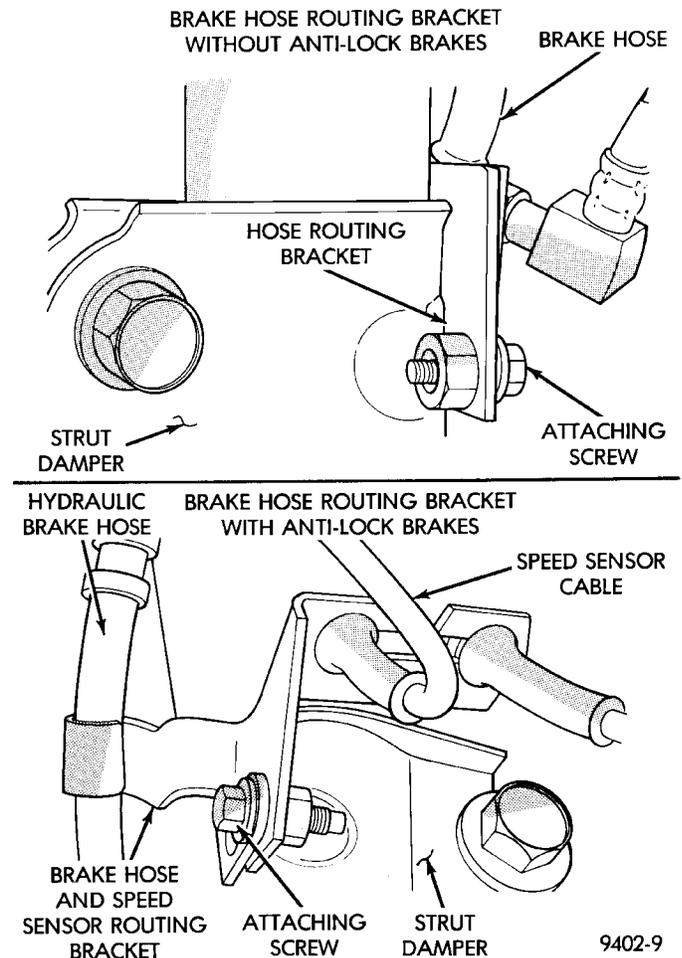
Brake Hose And Speed Sensor Cable Routing Brackets
